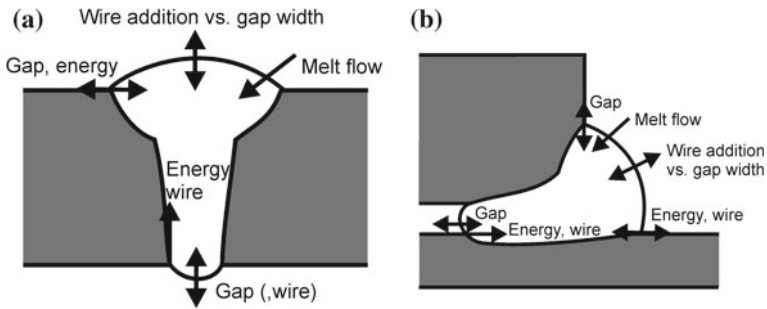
Theory of the governing mechanisms for the shape of a laser weld (with filler wire, or hybrid welding): a butt joint, b fillet joint
